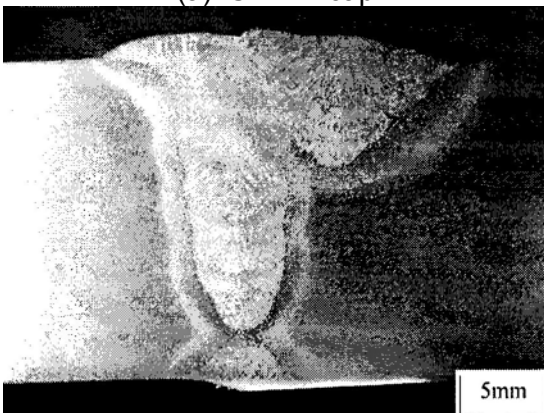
Typical Internal/External Mechanized Weld Macrosection
